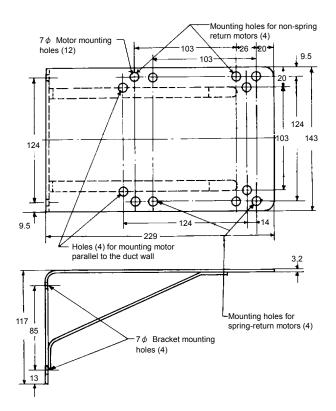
Dimensions (in mm.) of motor mounting bracket (160724A-BKT)
